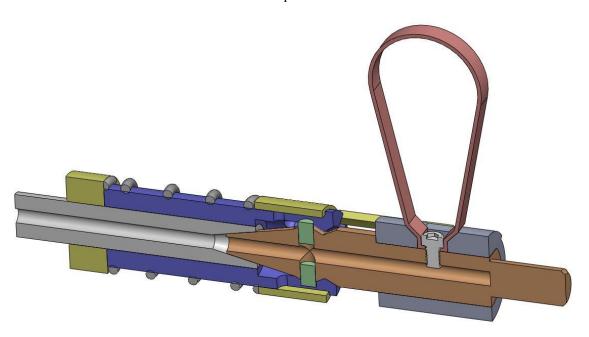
Spring biased socket moved back over the snaps, electrode carrier is locked in its position and cannot come off.
